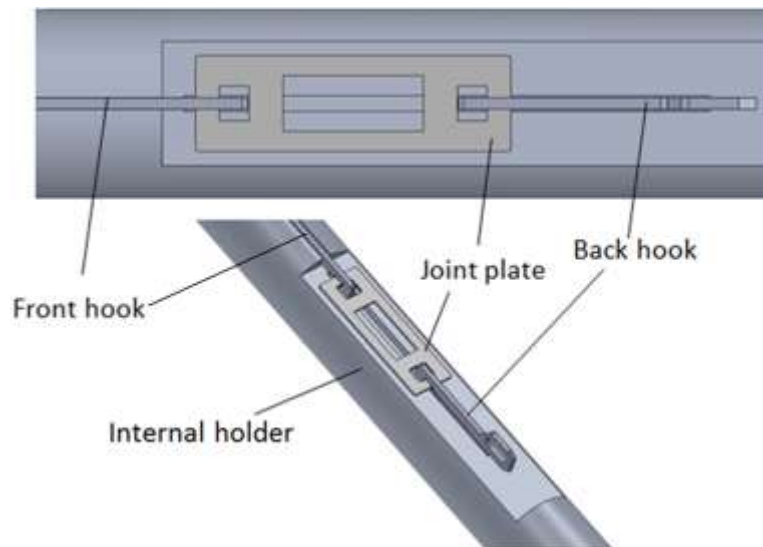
The rear concept diagrams of the clutch-spring mechanism.
